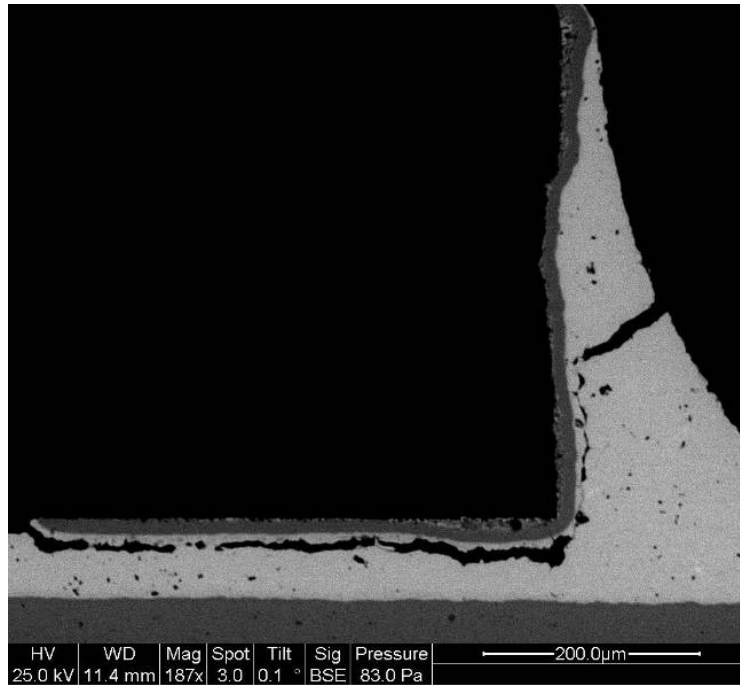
Solder crack of SAC305, resistor 8 (standard pad), failed at 39,551,400 cycles
